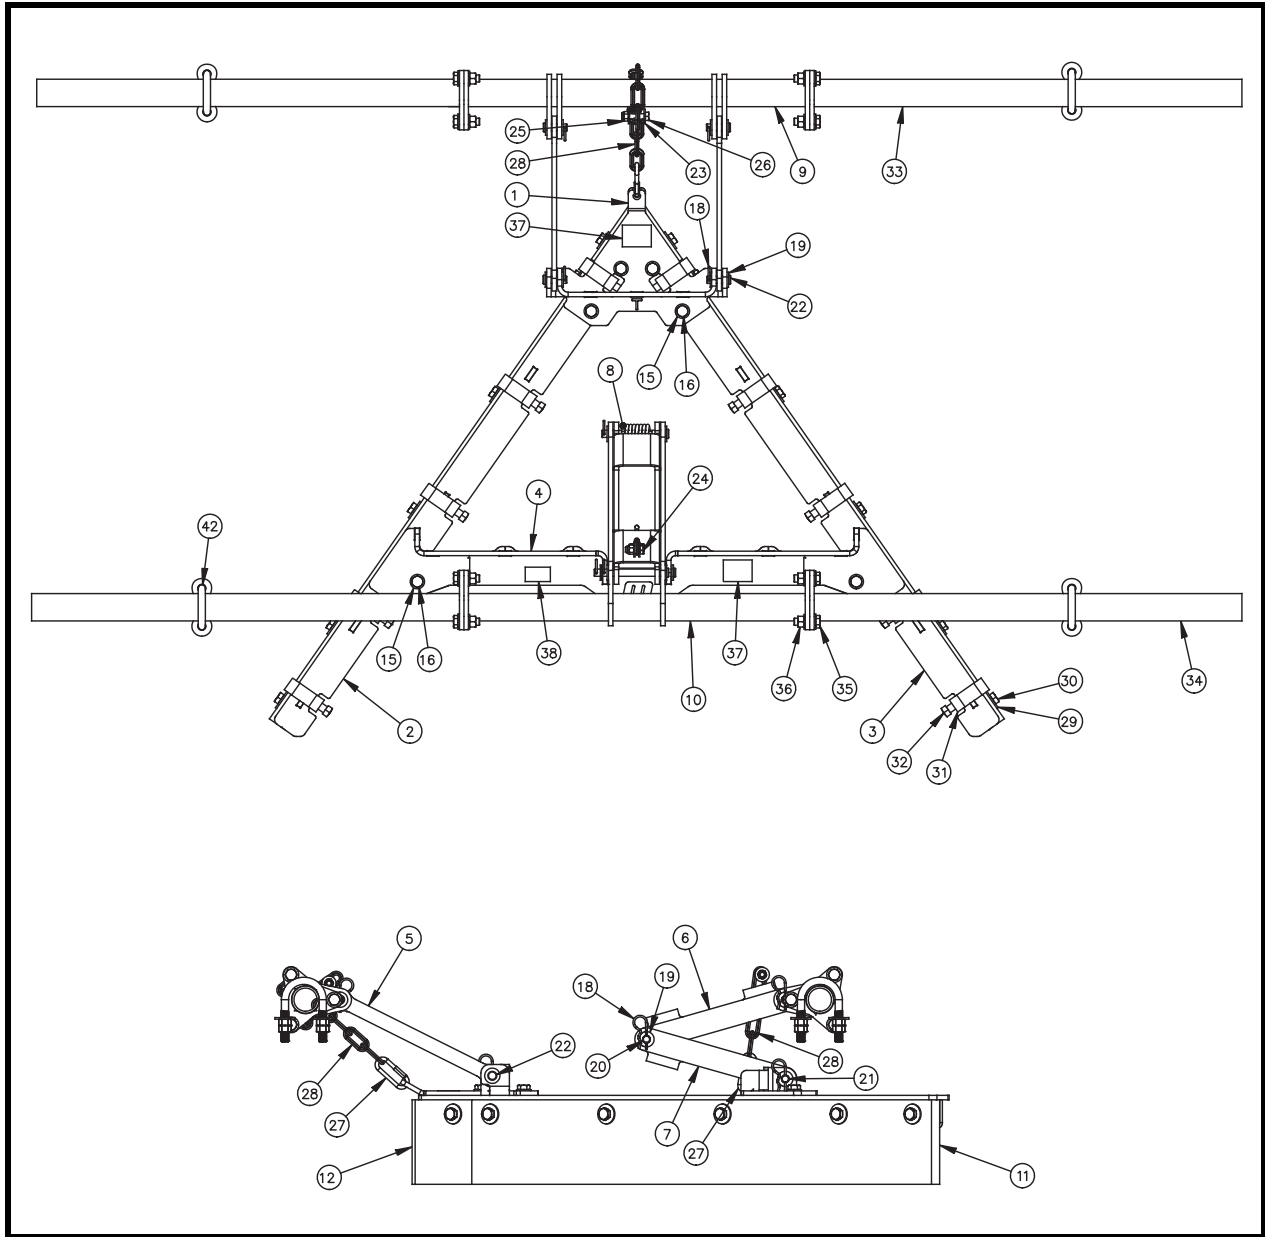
Martin® Torsion VPlow Plus Assembly, P/N CPVTASXXXXXXXX
